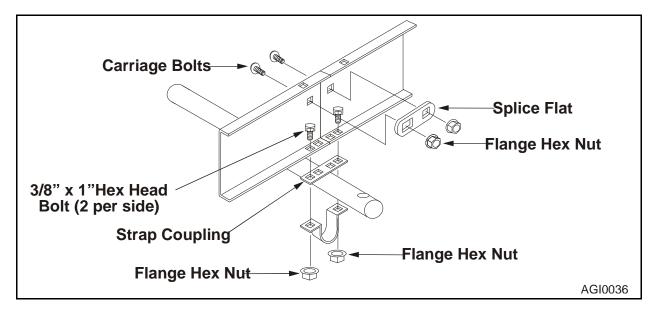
6 Splicing Adjoining Sections with Ceiling Hanger and Splice Flat
